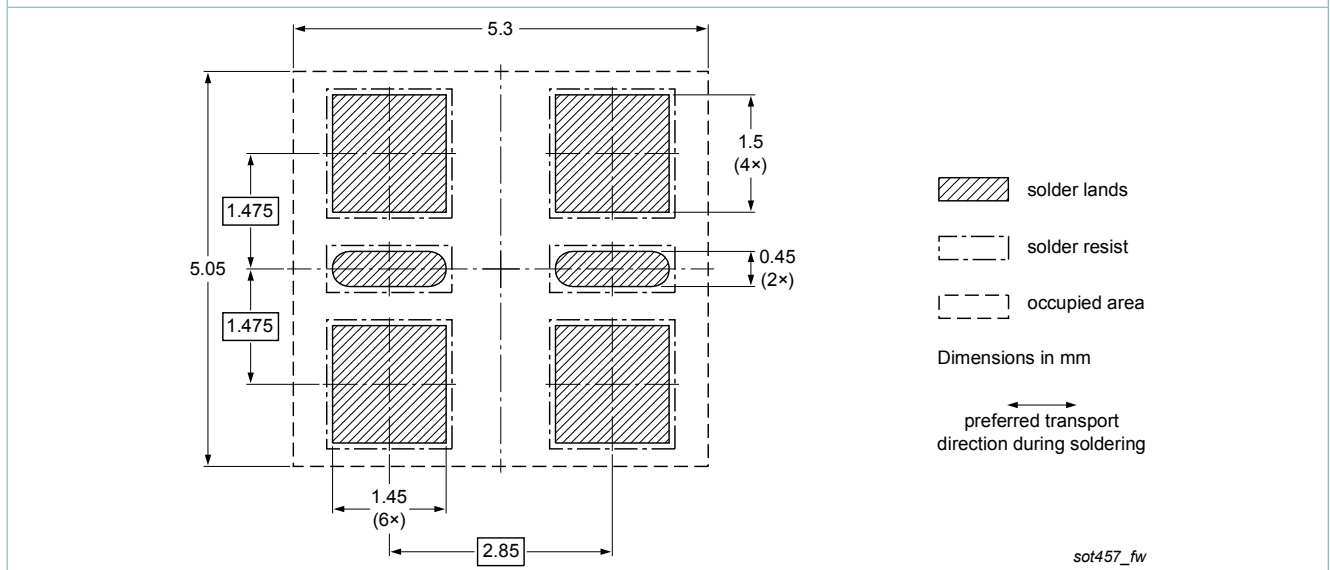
Wave soldering footprint for SOT457 (TSOP6)
